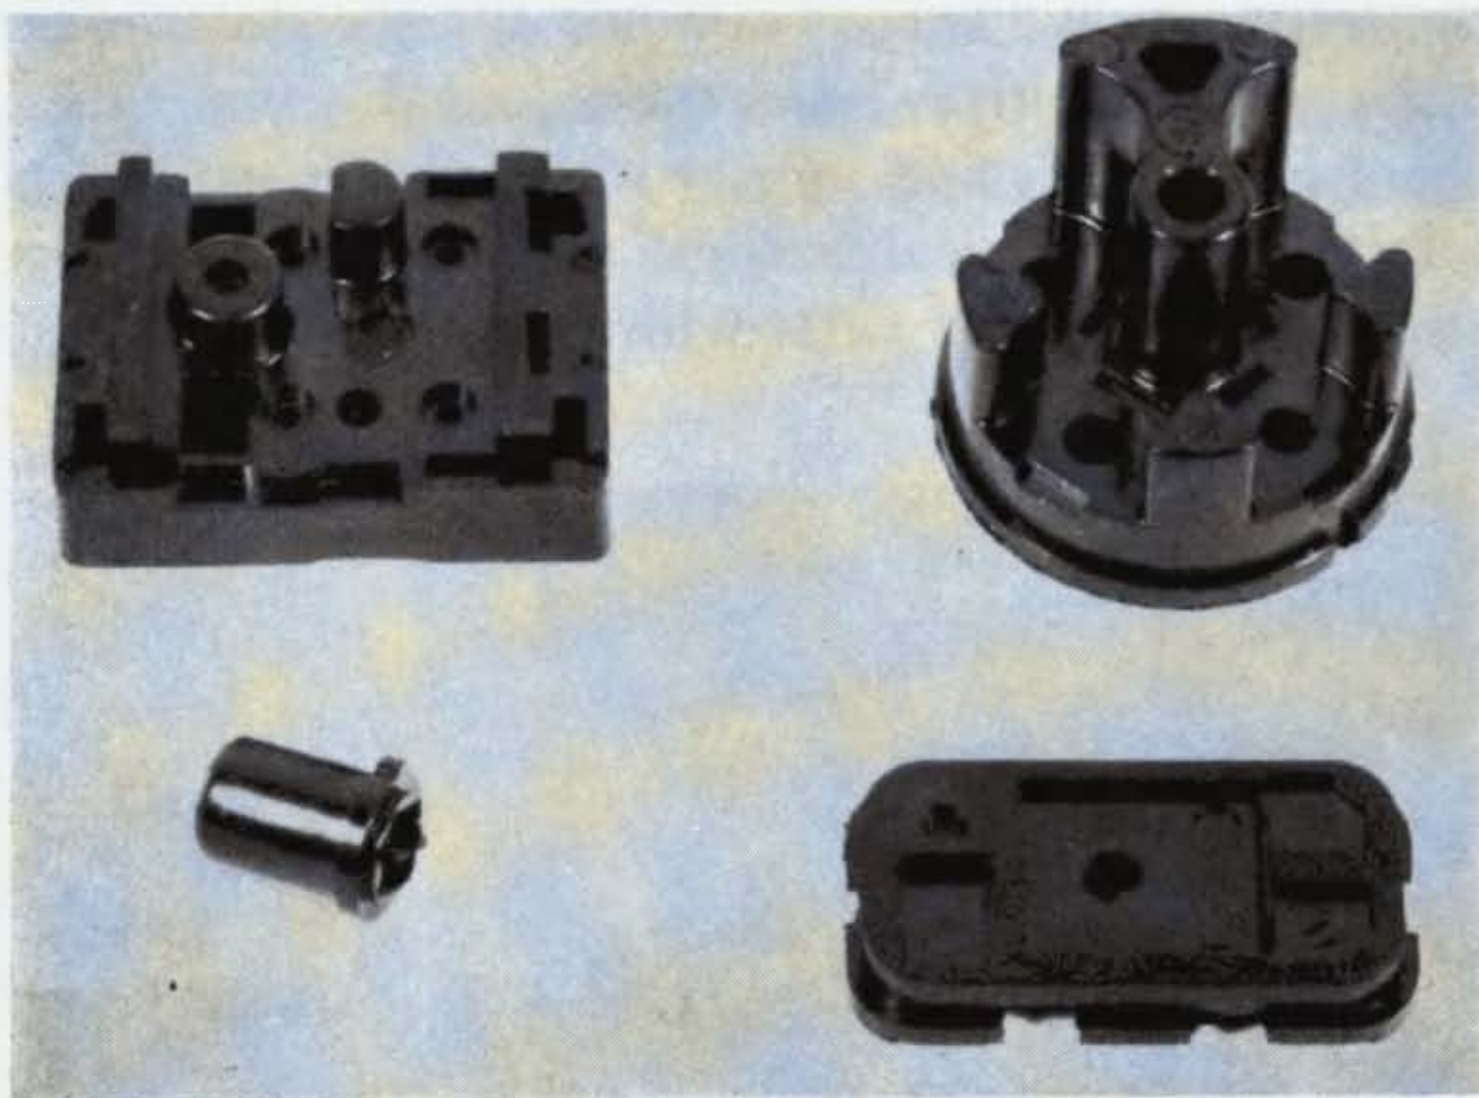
to 4.5 show examples of very small molded parts; a piece molded from a sisal-filled compound for mechanical strength and impact resistance; a molded part that requires mechanical strength, resistance to chemicals, and smooth finish; and parts with intricate detail.
